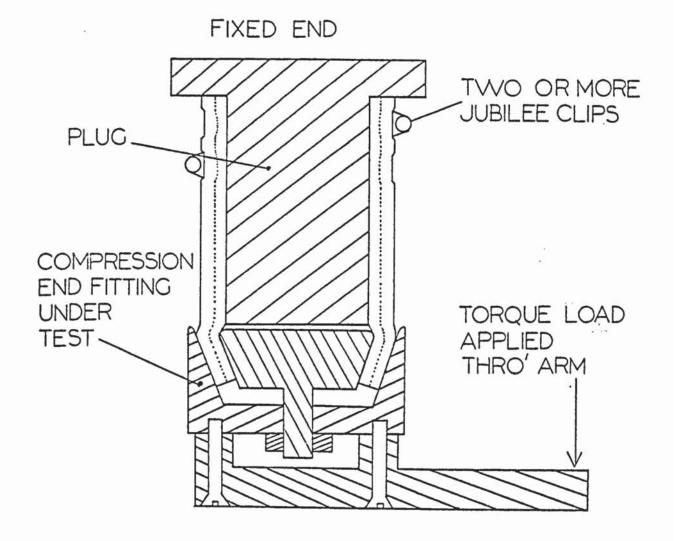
14: SKETCH SHOWING SECTION THROUGH COMPRESSION TYPE END FITTING.
